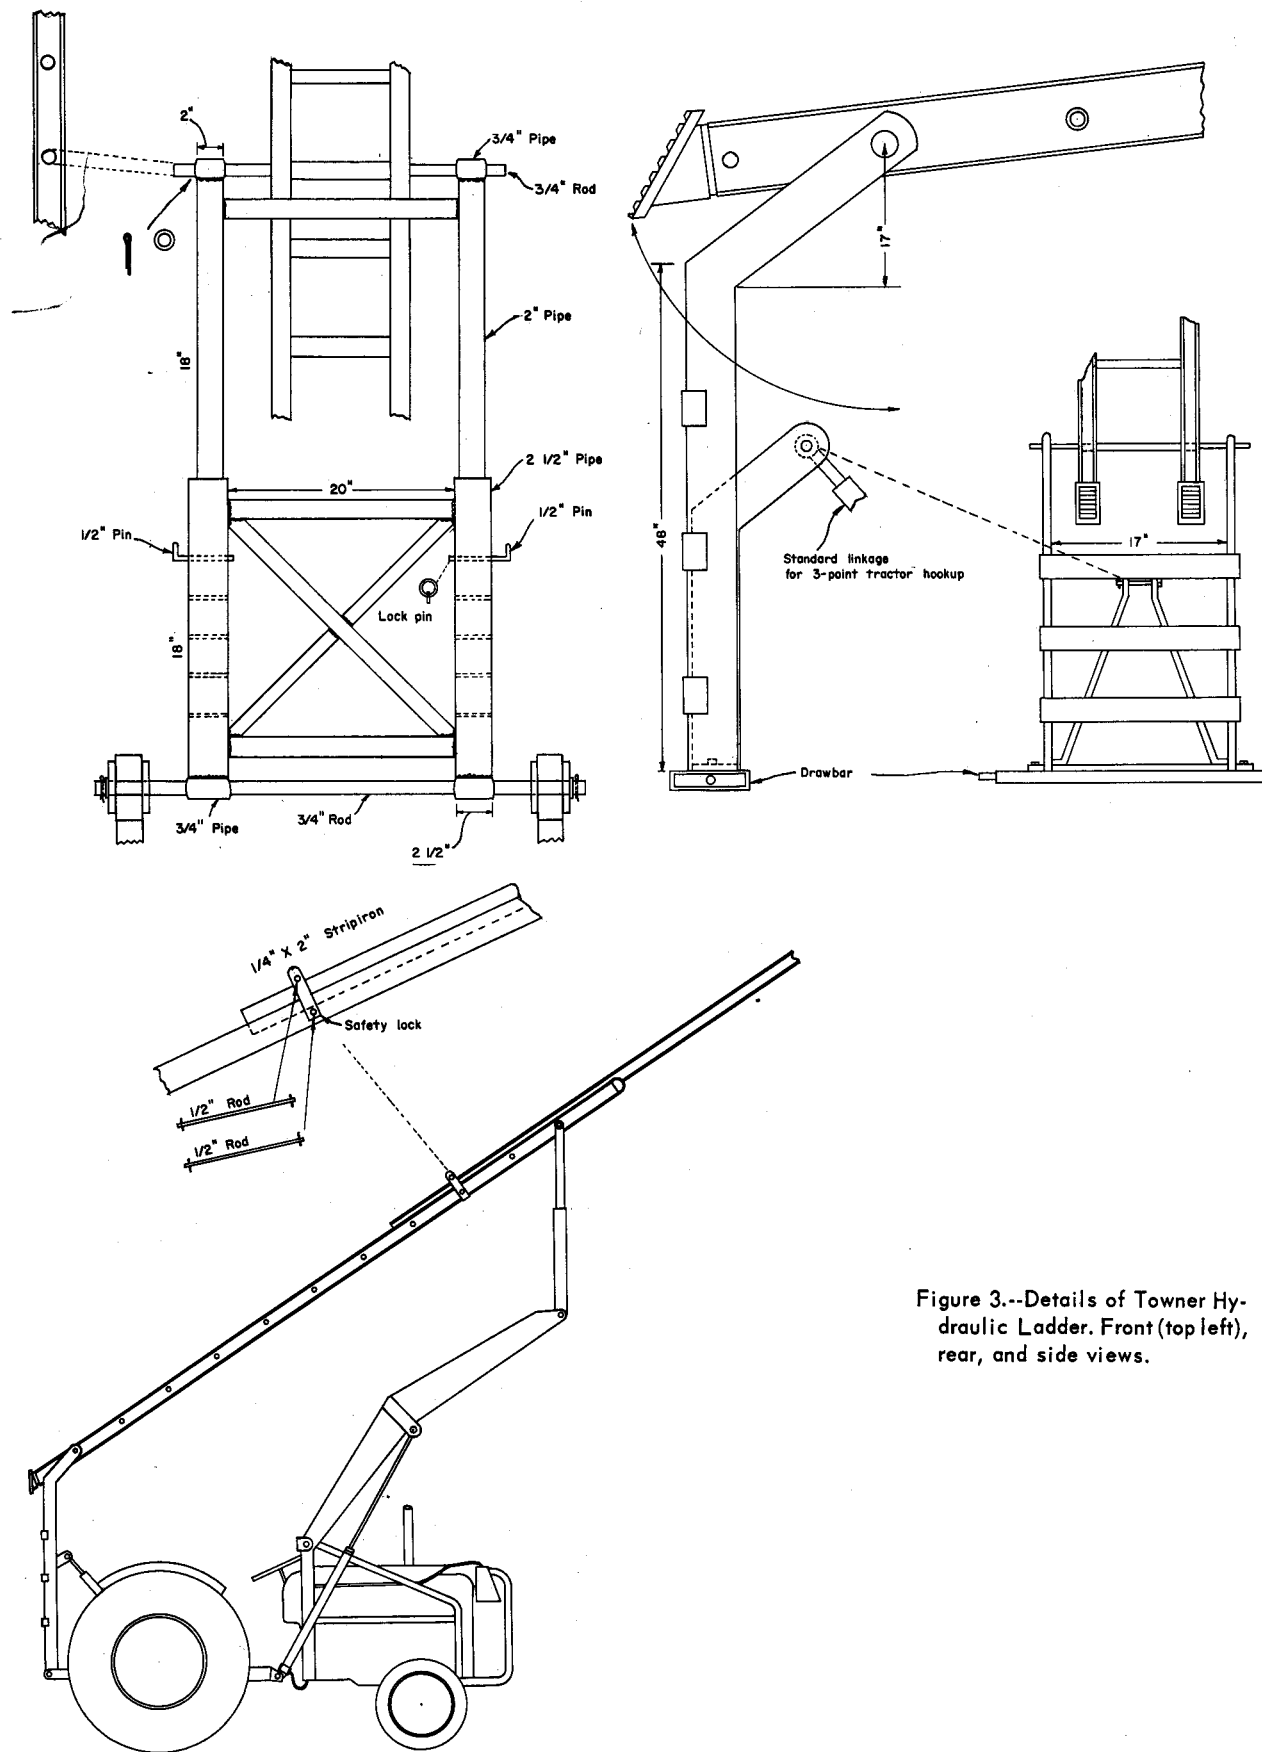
Details of Towner Hydraulic Ladder. Front (top left), rear, and side views.
